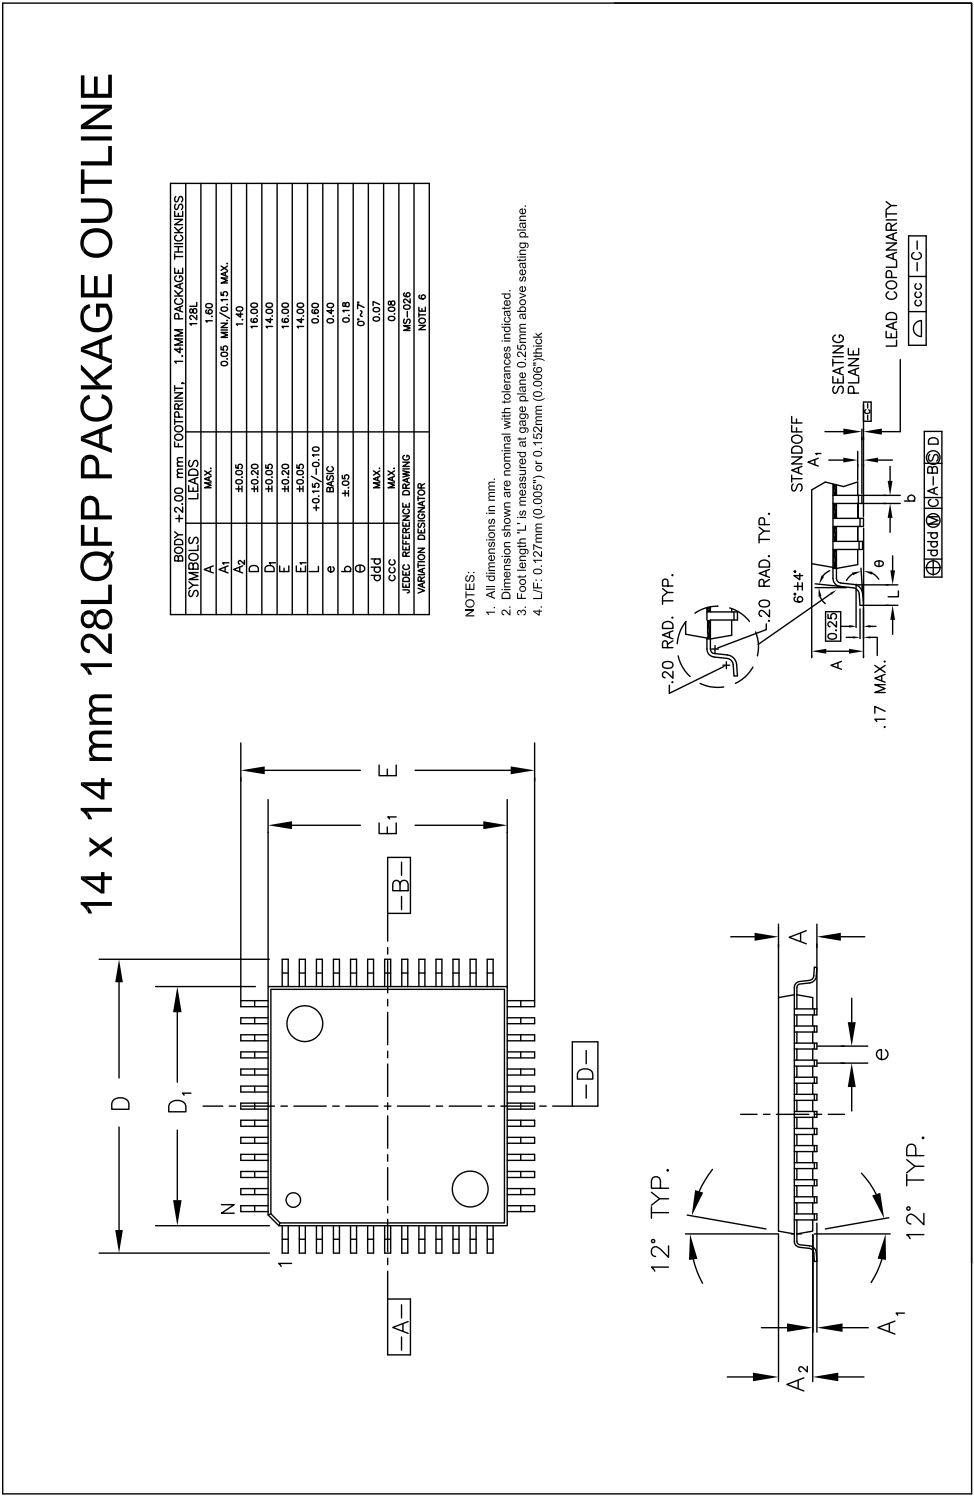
128-Pin Low-Profile Quad Flat Pack (LQFP) Package Drawing
